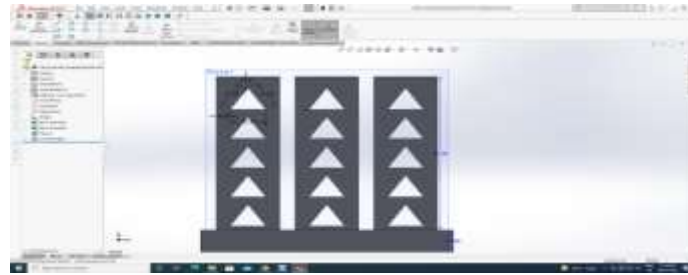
Dimension of Rectangular Hole (Front View)
